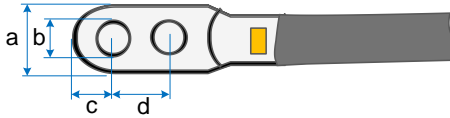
Dimensions of Terminal (Double-hole terminal)
